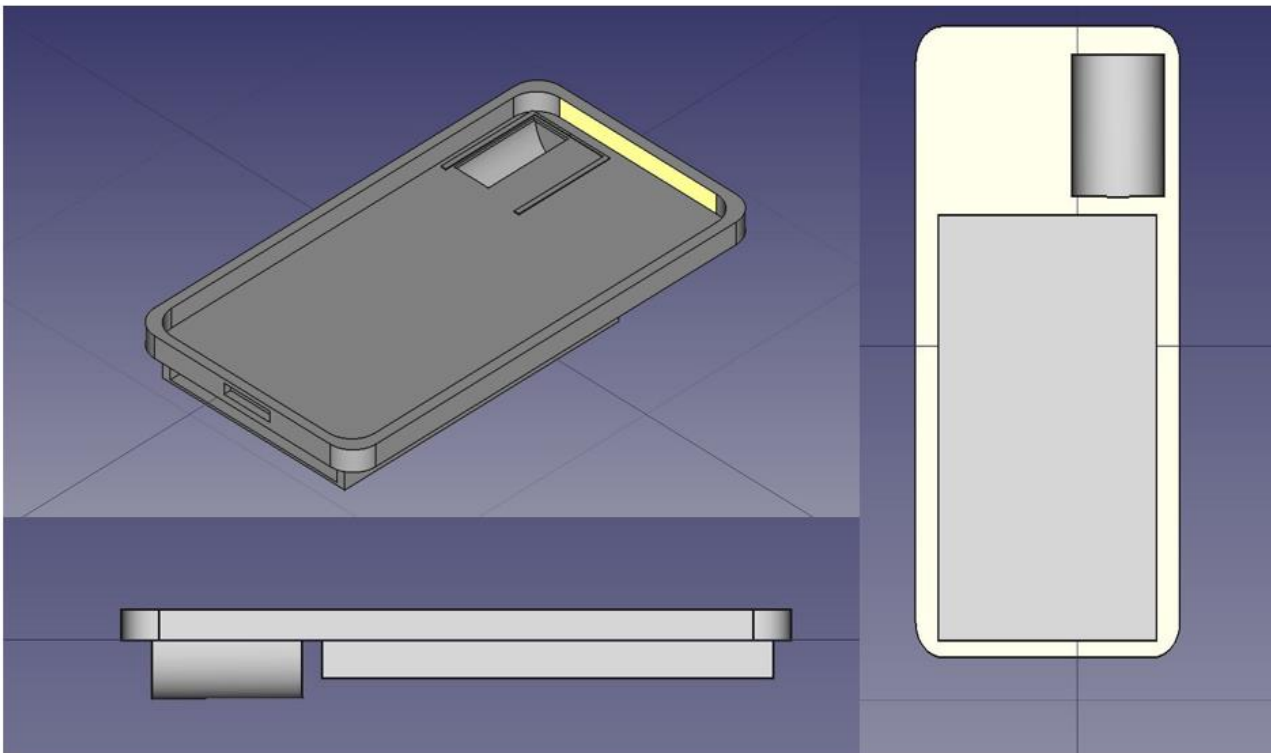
3D model of finger housing module - Top view, back view, and side view
